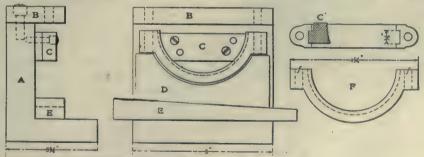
Combined Drilling and Milling Jig.—Fig. 2.
